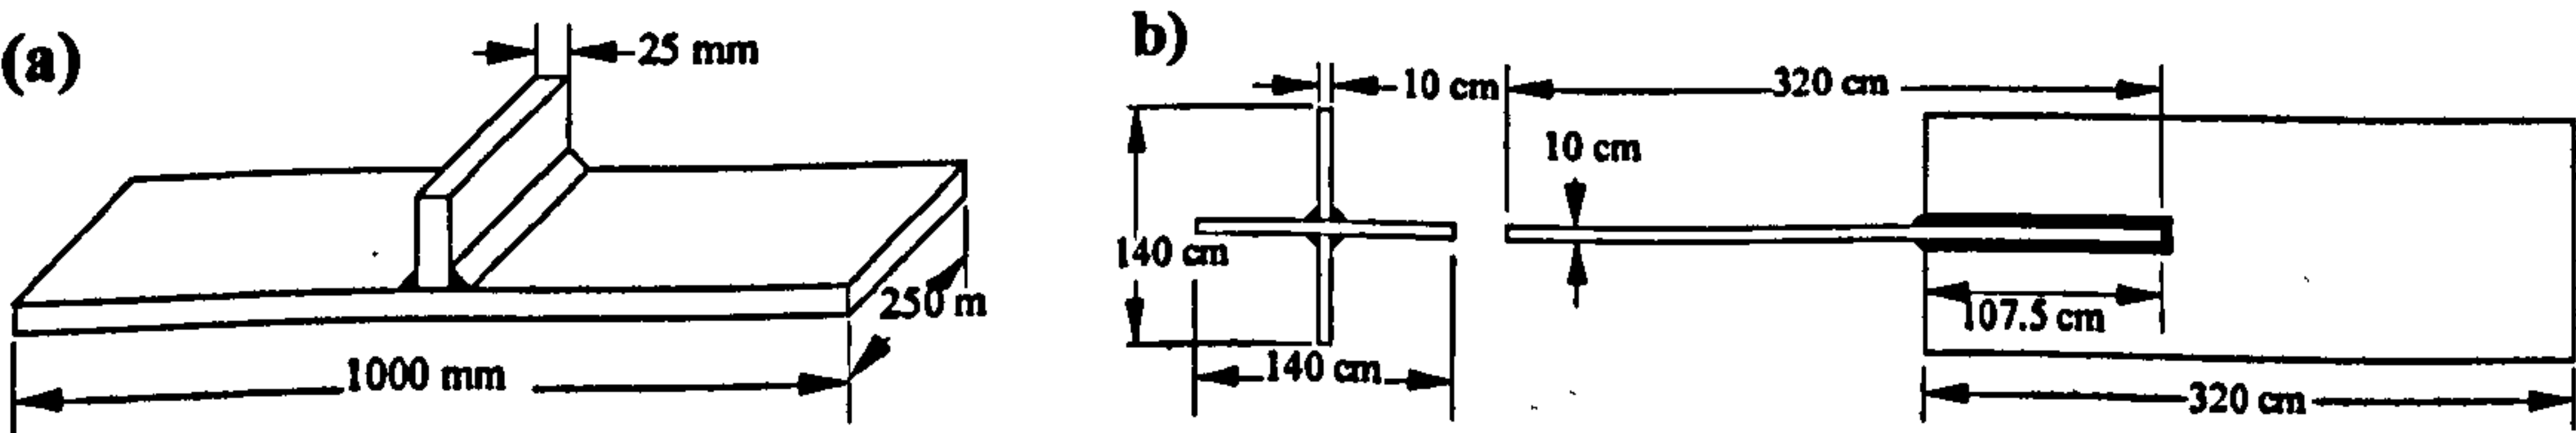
T-joint and egg box type welded joints.
